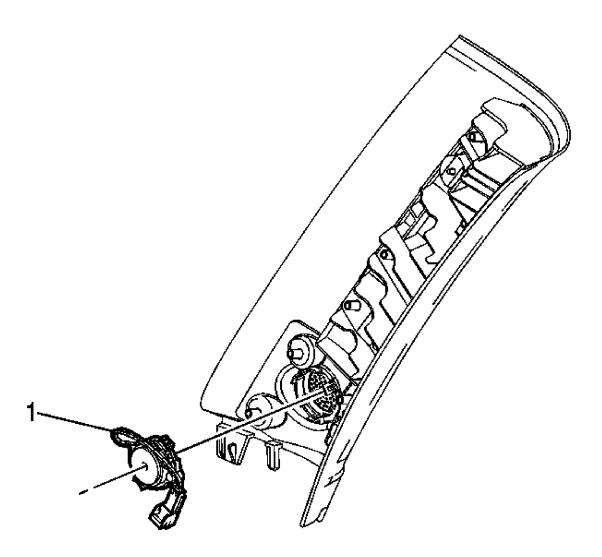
Speaker Replacement - Front Upper Courtesy of GENERAL MOTORS CORP.
